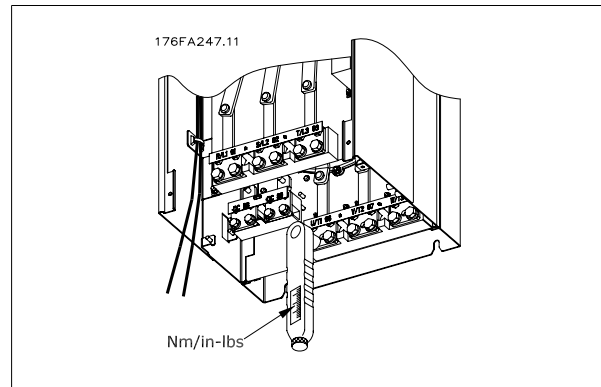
Always use a torque wrench to tighten the bolts.
